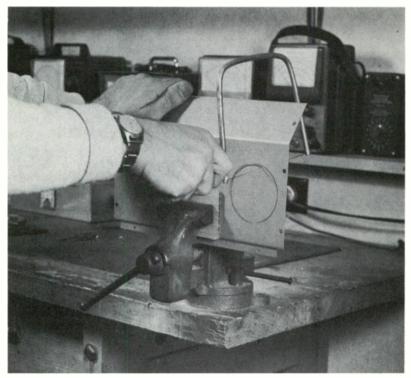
Cutting a large meter hole on a panel with a spiral-blade coping saw.
